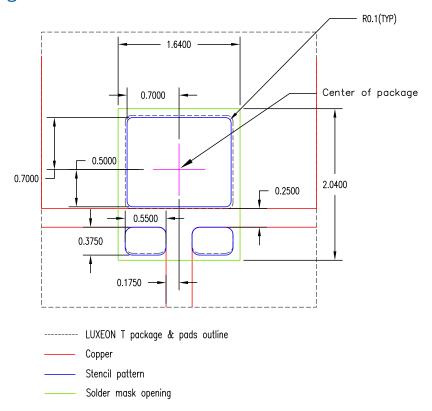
Recommended PCB solder pad layout for LUXEON T.
